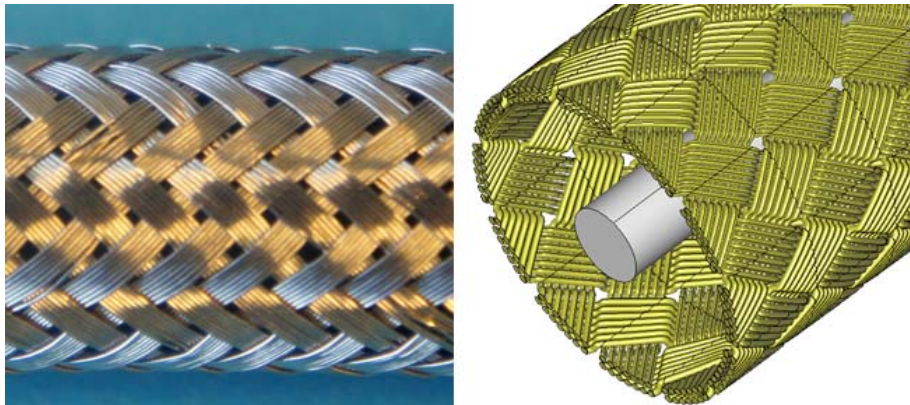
Left: Real braided wire shield. Right: CAD geometry.
